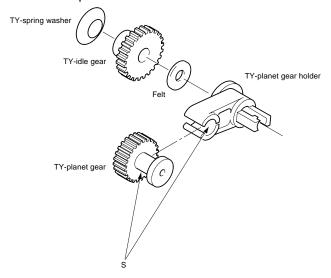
Chassis L/R TY-planet Gear Holder
